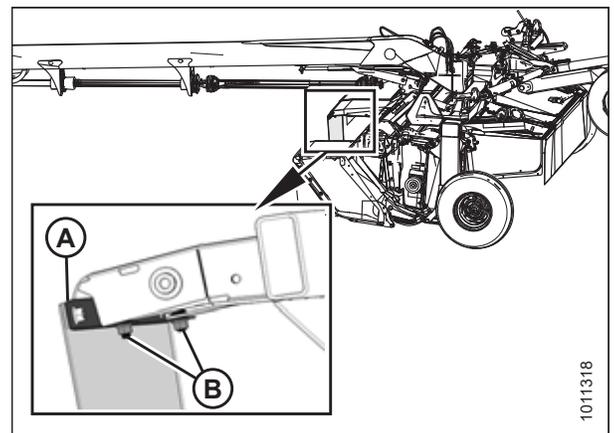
Inboard Curtain Attached to Rotary Disc Pull-Type
